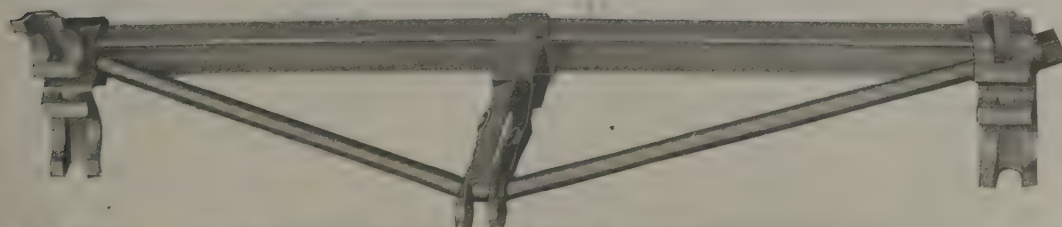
Davis Built-Up Brake Beam. Davis Brake Beam Company.
